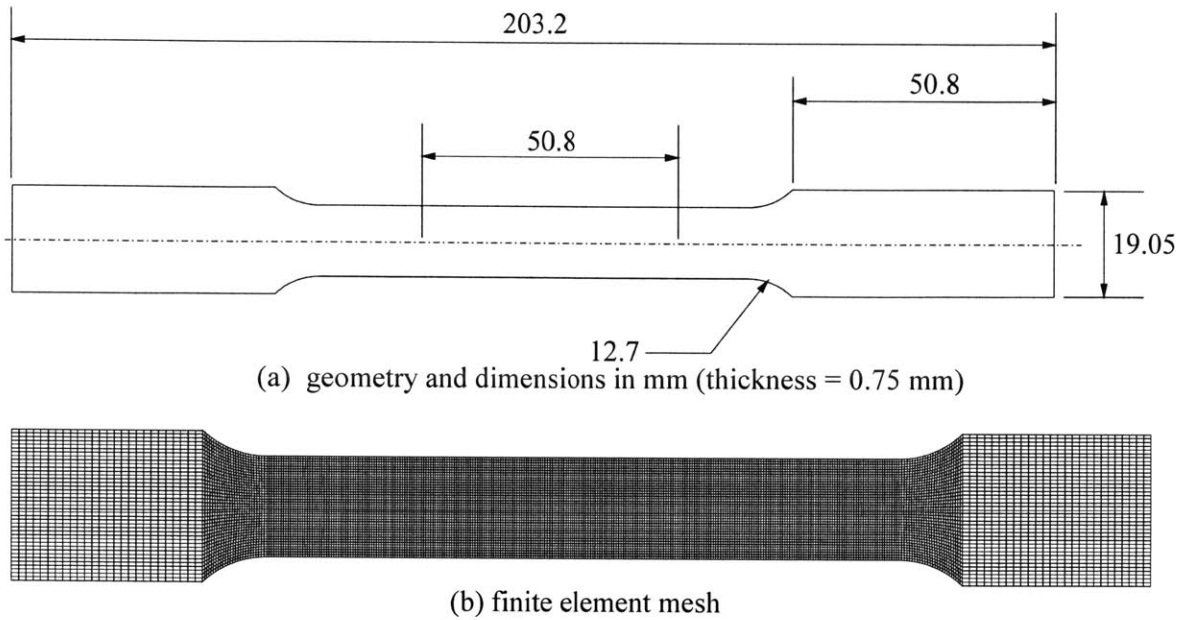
Geometry, dimensions, and finite element mesh of flat specimen for uniaxial tension test of mild steel - B used in the punch indentation test
